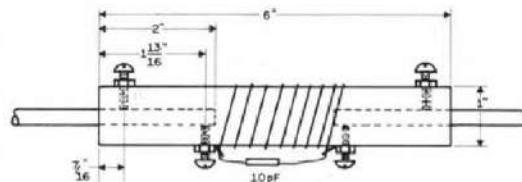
Principal details of the trap used in the 10-6 whip. The coil form can be any good insulating material. Weather protection can be provided with a plastic bottle fitted over the coil, once adjustments have been completed. If whip sections of larger diameter than the 7/32-inch original are used, it may be advisable to use a larger-diameter form. Turns information can be modified, so long as resonance at the 50-MHz operating frequency can be obtained.
